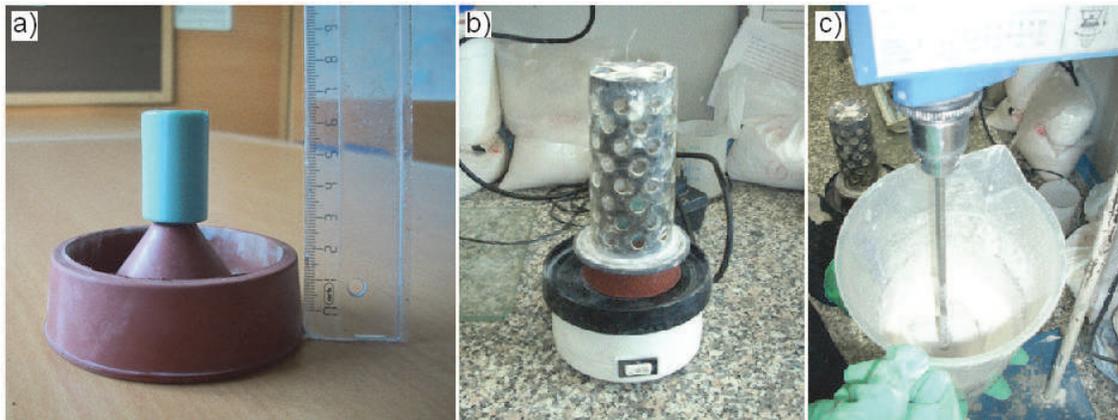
Materials and devices used for mold preparation:(a) wax pattern mounted to the runner head, (b) flask on the vibration machine and (c) preparation of gypsum slurry with mechanical mixer.
